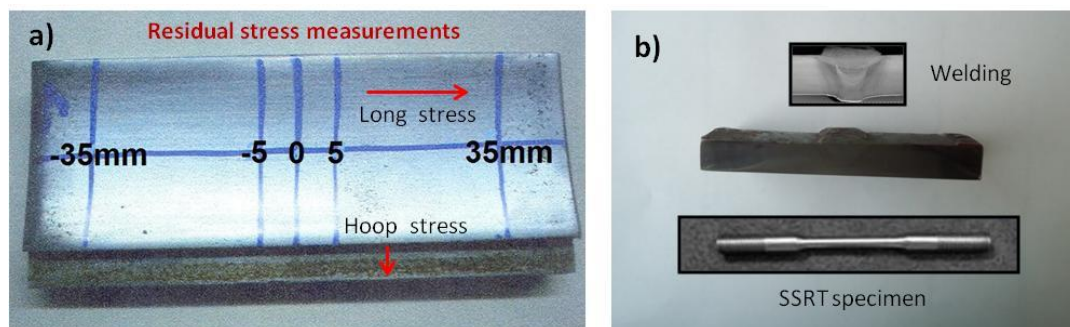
a) Location of the residual stress measurements, b) Cross section of the welding and SSRT specimen.
